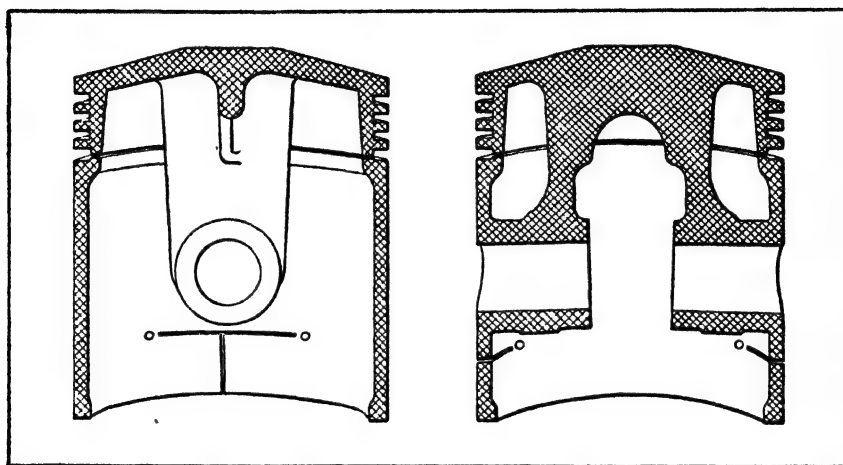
Sectional View Showing Construction of Dycer-Austin Replacement Piston.
